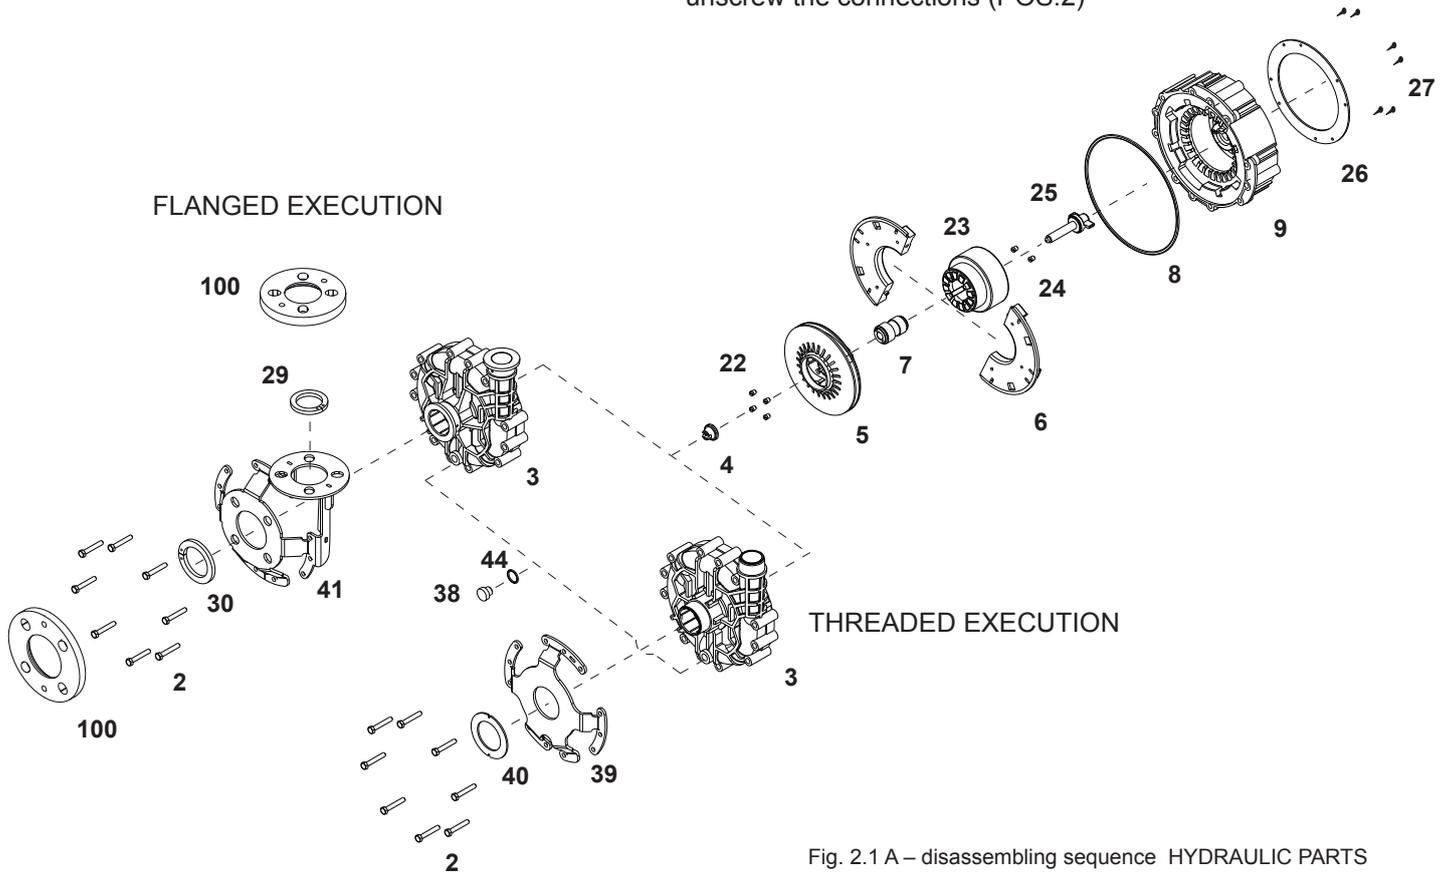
A – disassembling sequence HYDRAULIC PARTS
